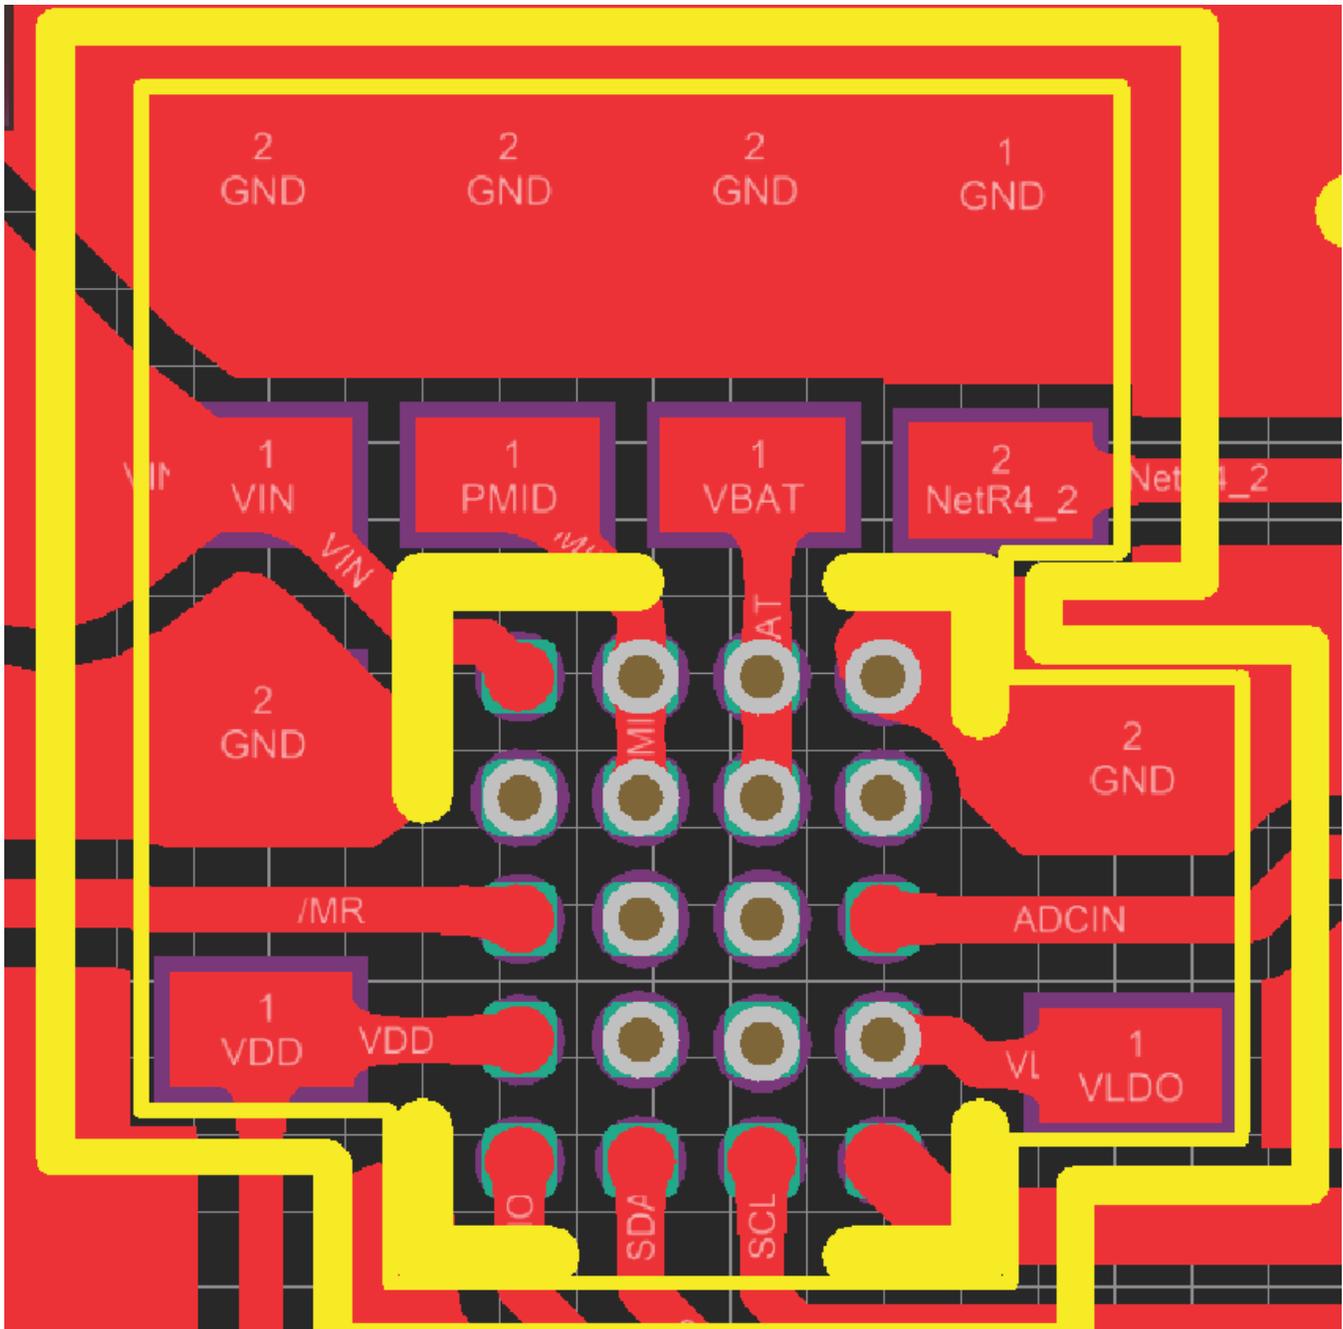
10 mil / 6 mil Vias on the Solder Ball Pads and 6 mil Traces Away From Pads and Vias
